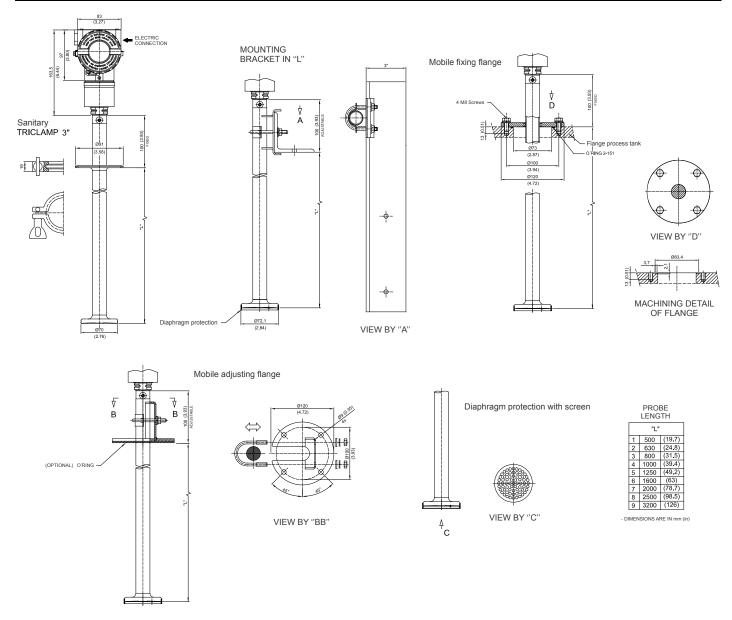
(e) - Dimensional Drawing and Mounting Position for LD292 – Level (Insertion)
